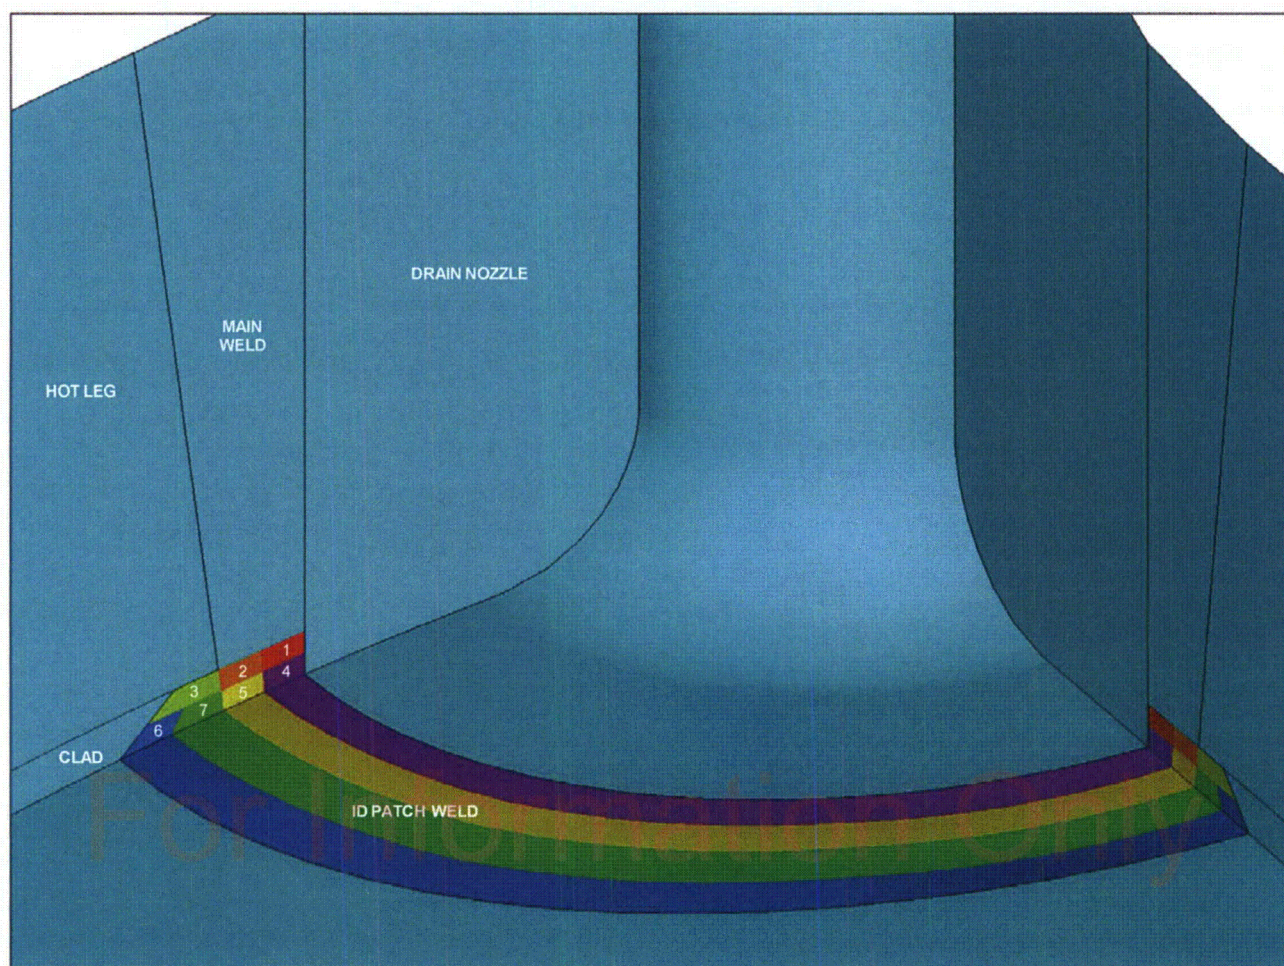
Weld Nugget Definitions for the ID Patch Weld
